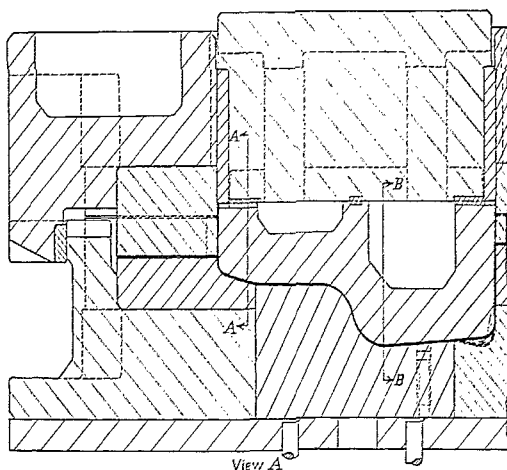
Double-action die for drawing a body oil pan. (Cadillac Motor Car Division, General Motors Corp.)
